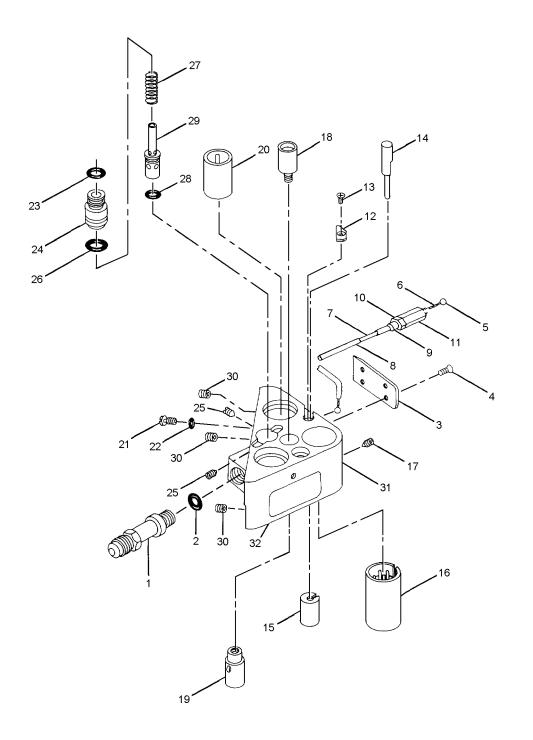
Intermediate Block Assembly (Rocket Jet)
